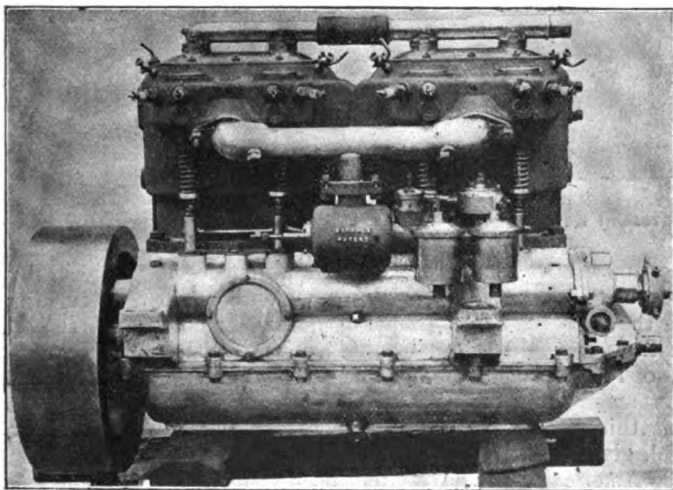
General View of Inlet Side of Dorwald Engine.
